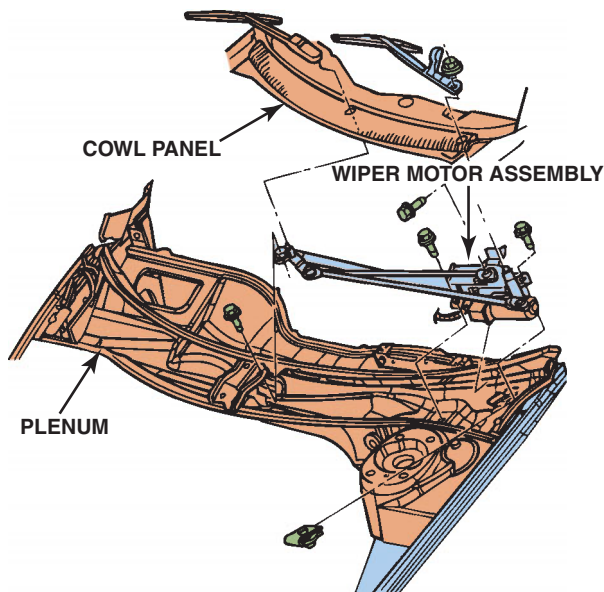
The wiper motor and linkage mount under the cowl panel on many vehicles.
